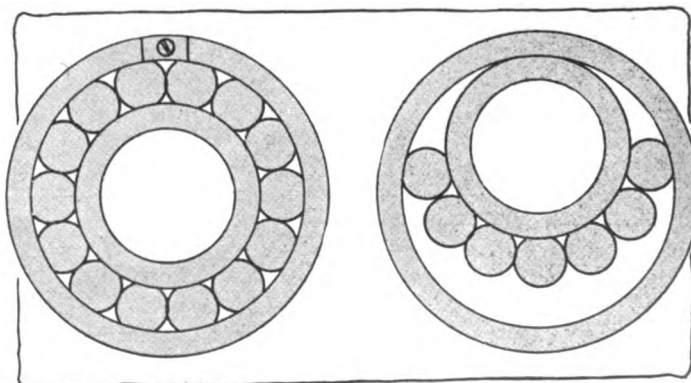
Two types of annular ball bearings to show method of assembly. At the left is a full race and in order to insert the balls a part of the outer race is removable. If the races are made solid, then fewer balls must be used so that they can be inserted by placing them eccentrically, as at the right
